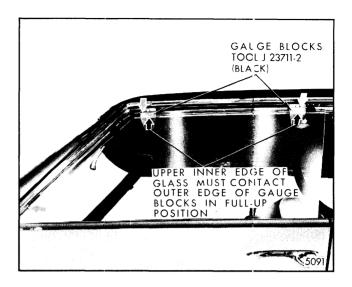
Front Door Window Alignment (In and Out and Up-Travel Adjustment)
